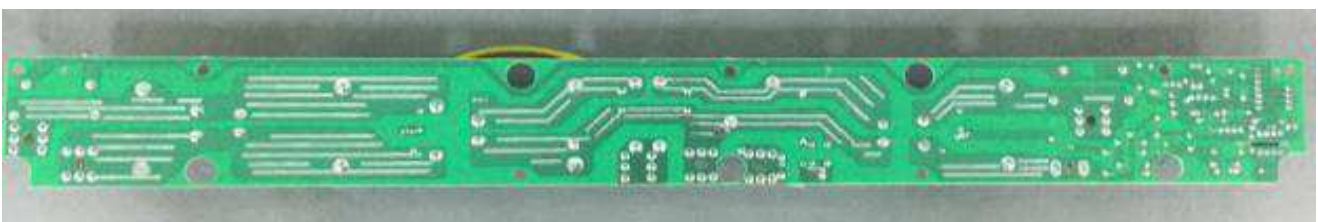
Optional internal view of C74E Power PCB 02 (bottom)
